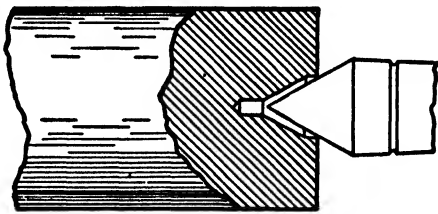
An incorrectly drilled center hole. The hole is too deep. (South Bend Lathe Works)
